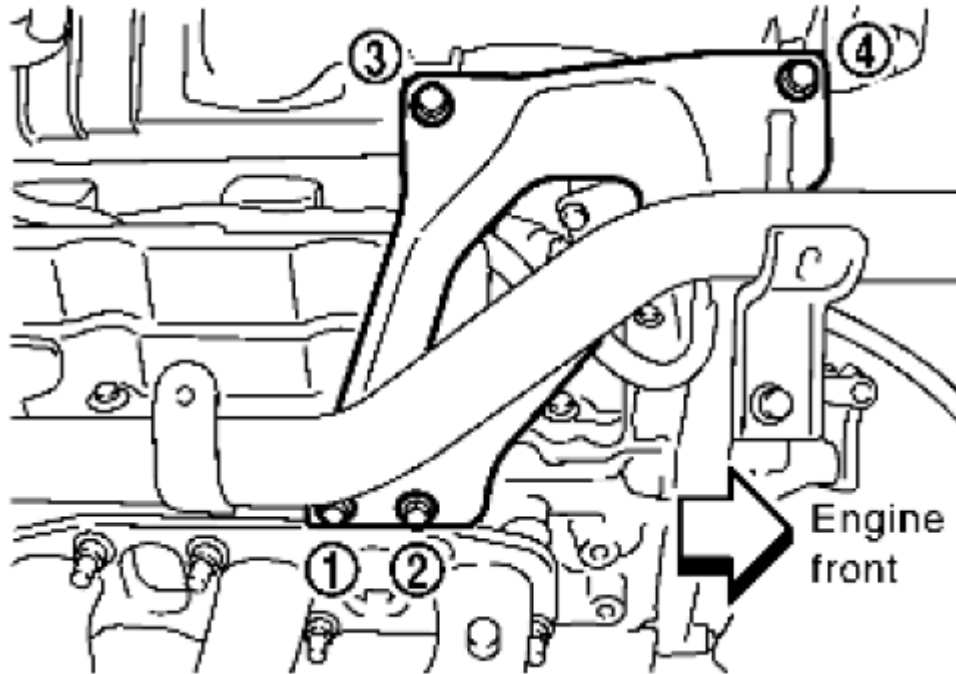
Identifying Intake Manifold Collector Support Bolts Loosen Sequence
